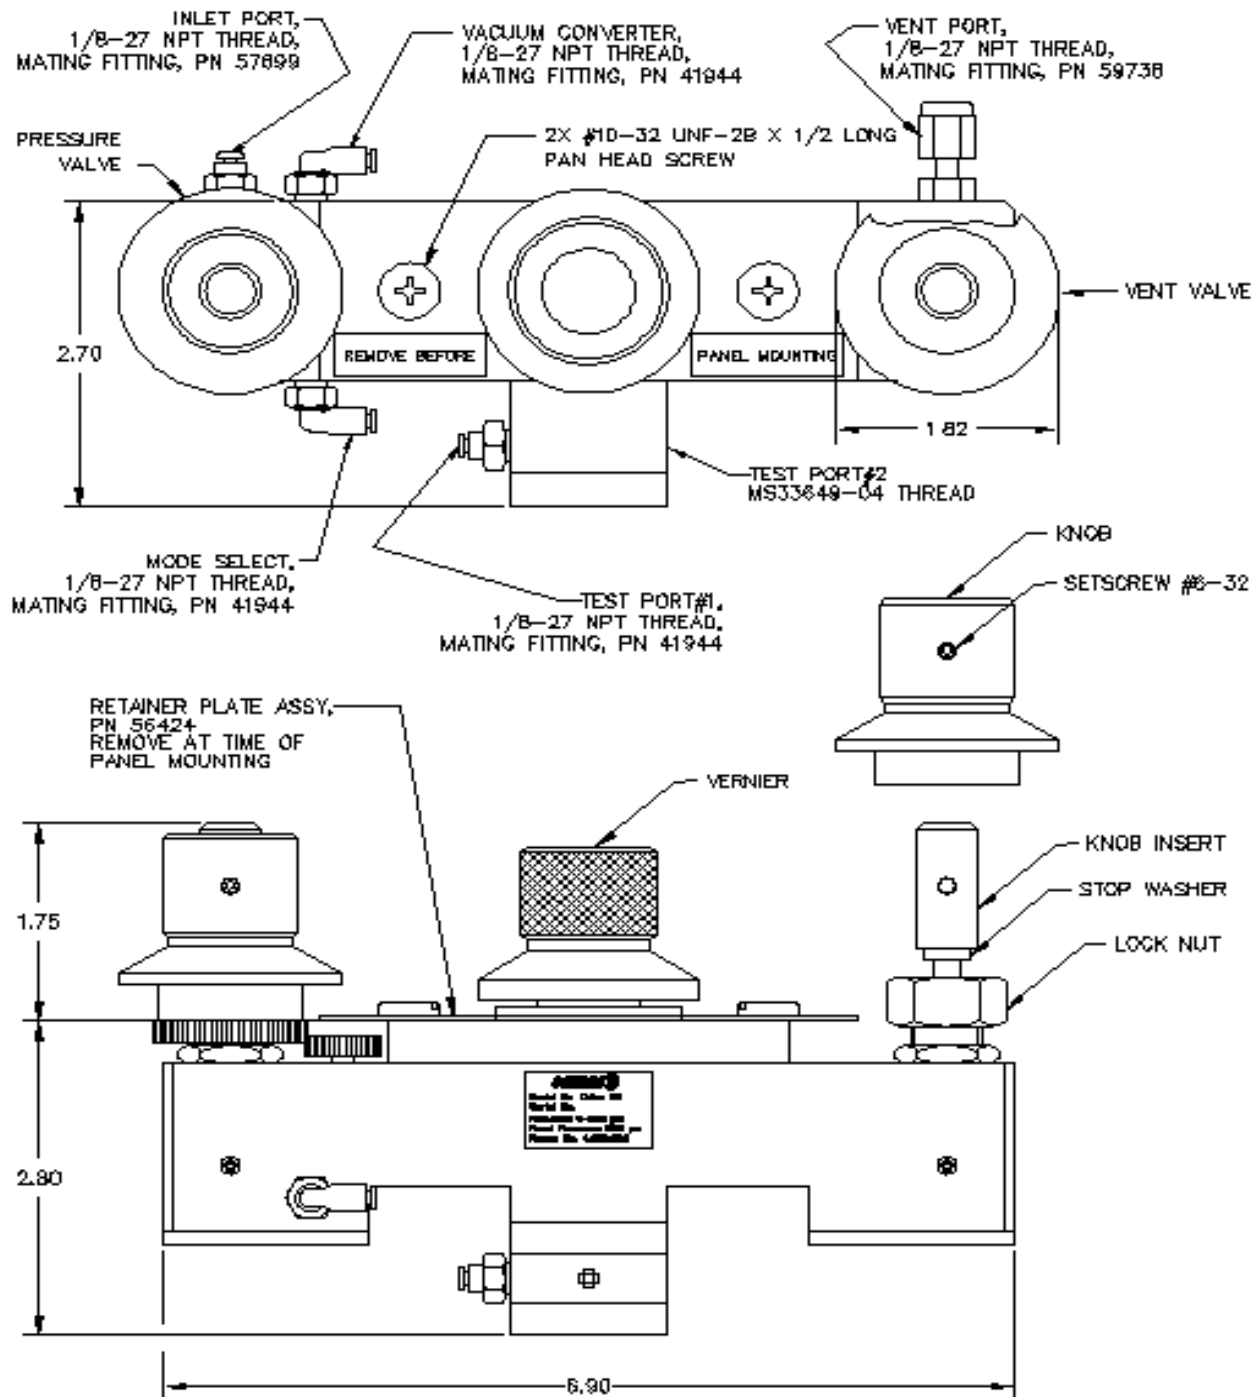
ORION-2D Valve Assembly (PN 55286) Mounting View
